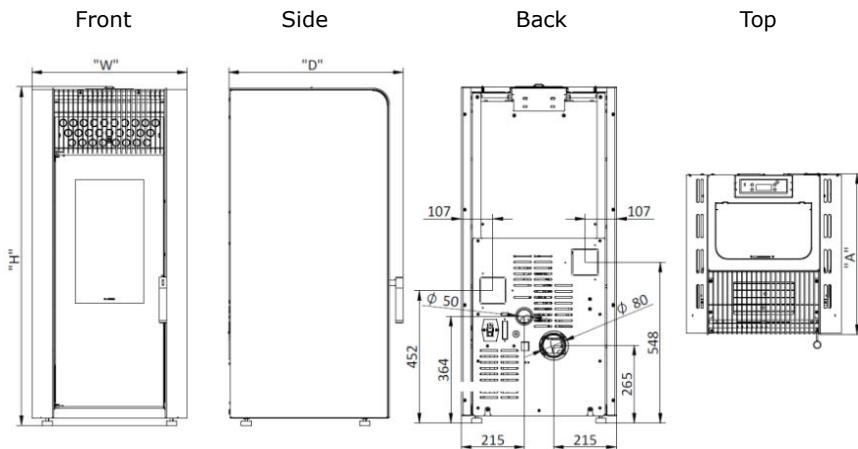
E - Dimensions of the free-standing pellet fire unit K600 (example model Aspen)
